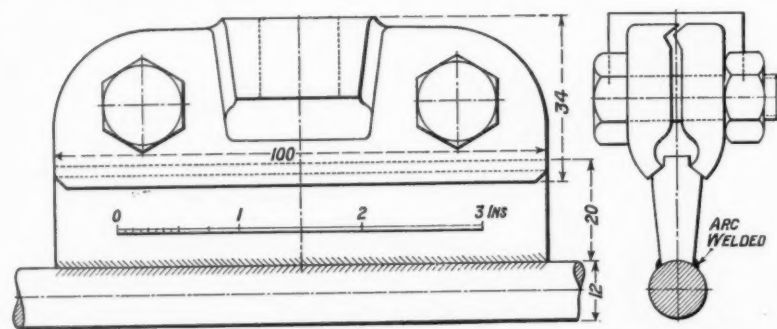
Detail of the fixing piece used at the end of each length of steel contact wire, October Railway
